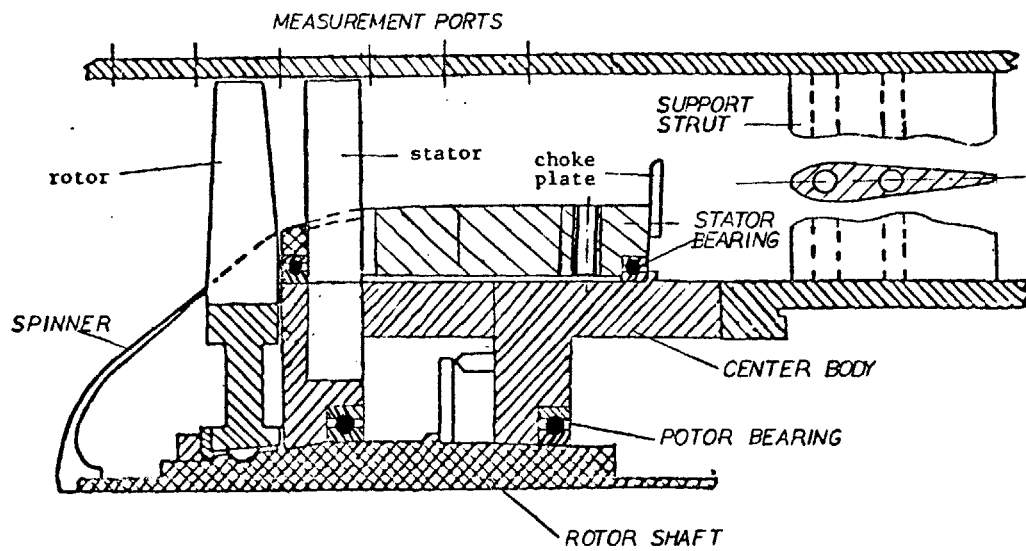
Sectional View of the Test Section (Stator Free to Move)
